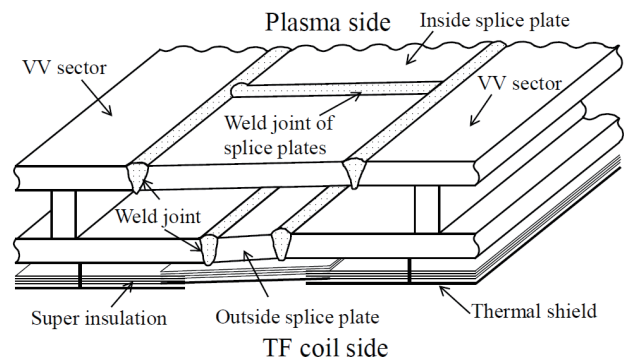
Image of weld joints between VV sectors [4].
